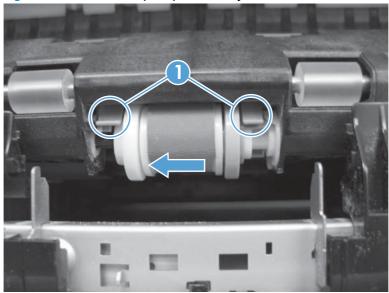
Remove the separation roller assembly (Tray 2) (2 of 2)
